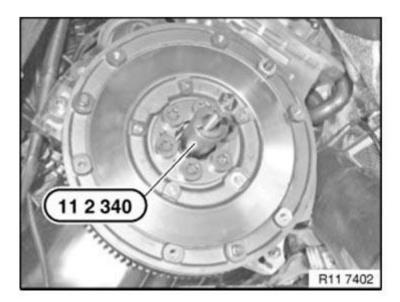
Removing Guide Bearing Using Special Tool 11 2 340 Courtesy of BMW OF NORTH AMERICA, INC.
